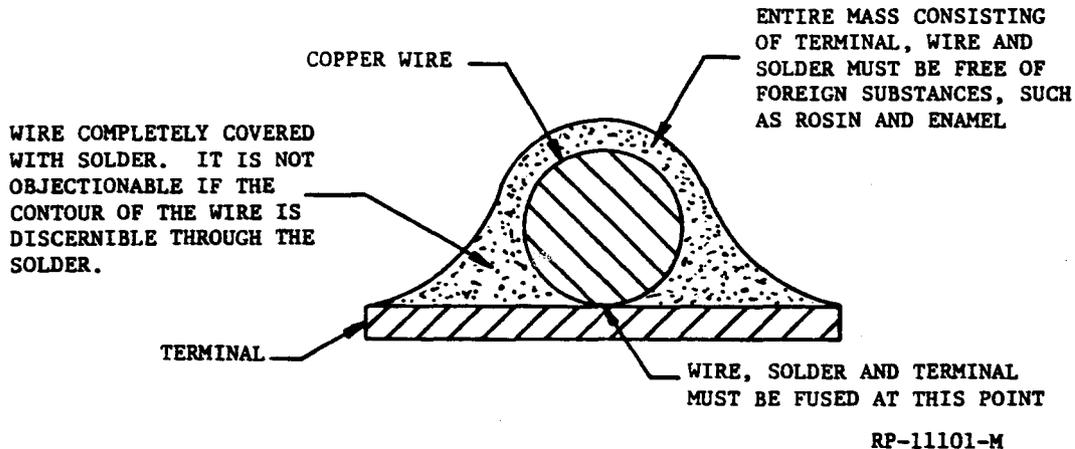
CROSS SECTION OF A TYPICAL PROPERLY SOLDERED CONNECTION (PAR. 2.11)
